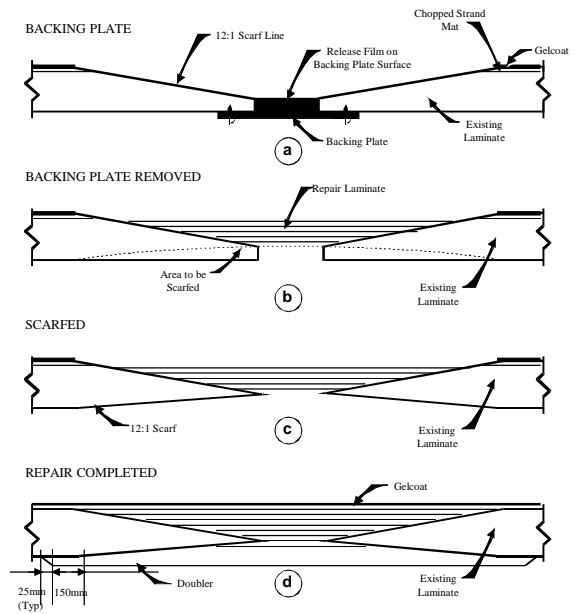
Backing Plate Installation - One Sided Scarf Repair
